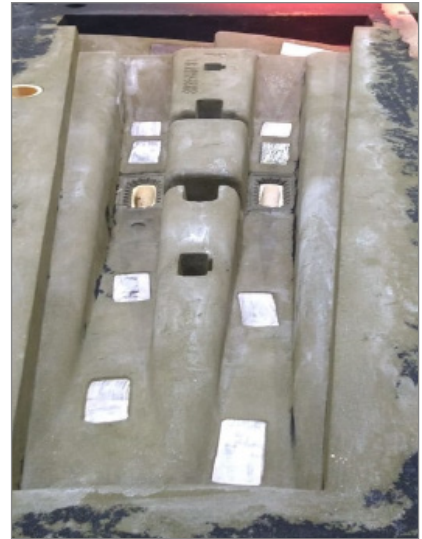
and b. Shows the mould/core before coating with INSTA coating.
